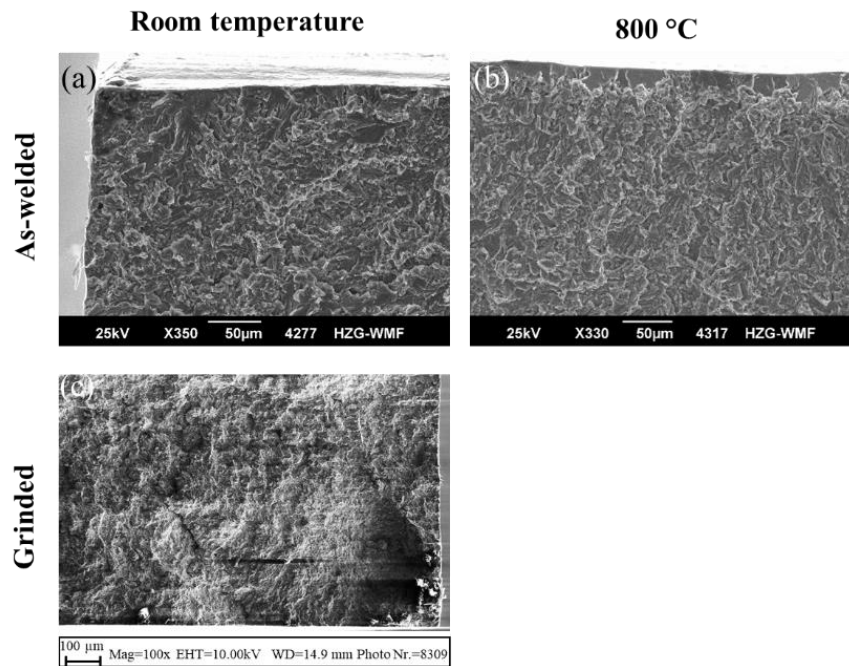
Fracture surface of (a), (b) as-welded and (c) grinded similar TNM tensile specimens tested at (a), (c) RT and (b) 800 °C and welded with $P=4.5$ kW, $v=3$ m/min, $T_{ph}=800$ °C.
